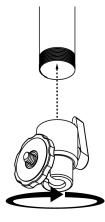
Attach the Ball Socket Assembly to the Extension Tube
